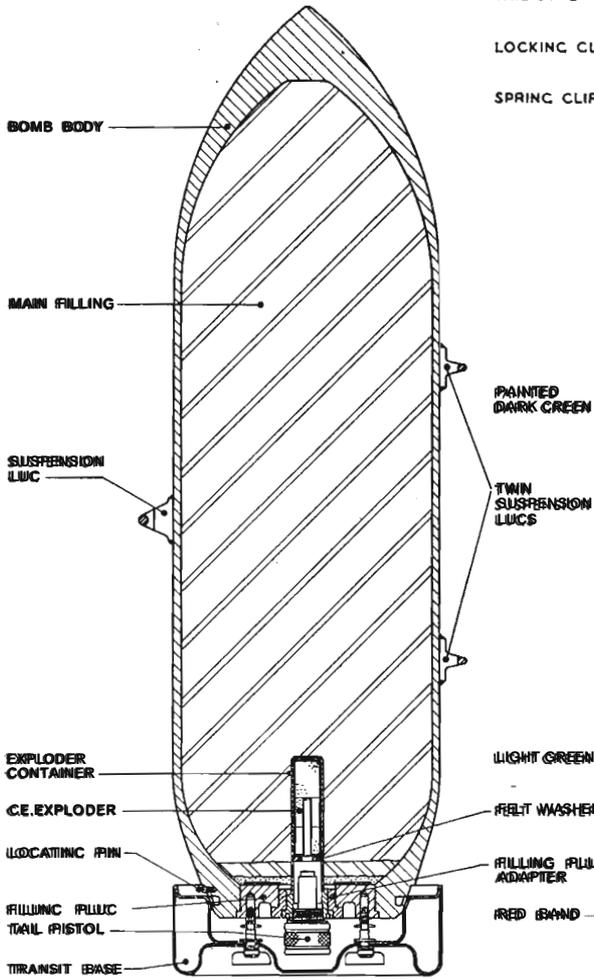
Sectional view of Mk. X bomb fitted with No. 36 transit base
